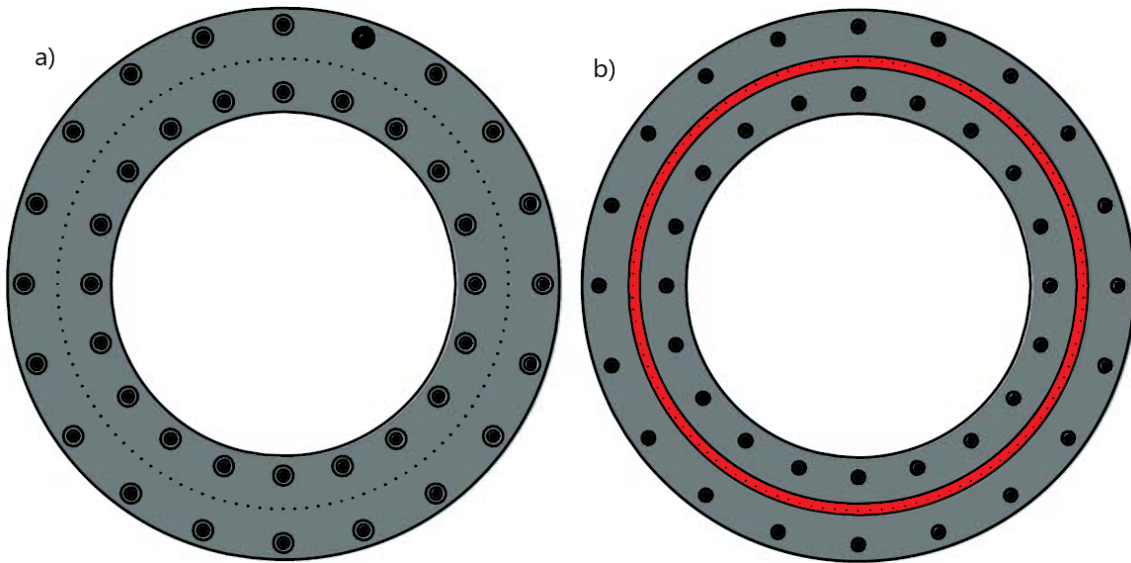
Radial RDE Fuel Injection Ring. (a) Top View and (b) Bottom View.
